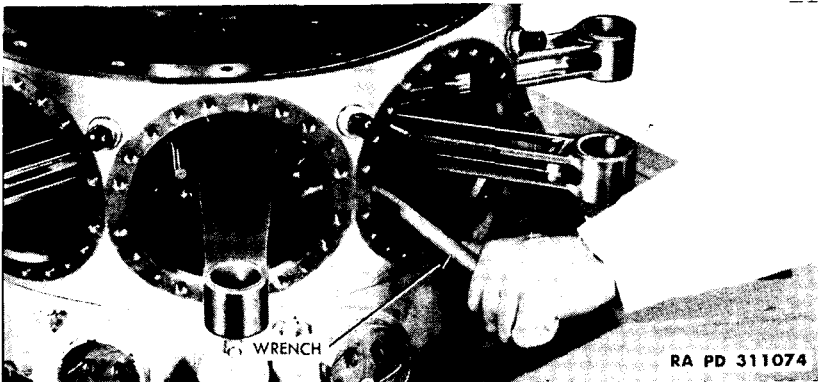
Removing Crankcase Main Section Nuts, Using Wrench 5A2306
